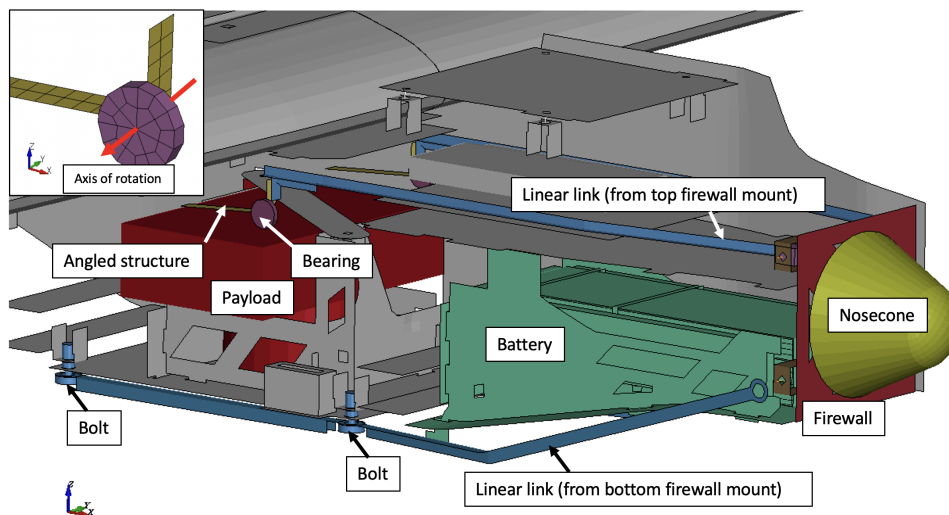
Integration of payload drop mechanism into UAS. Revolute joint for angled geometry in the inset.
